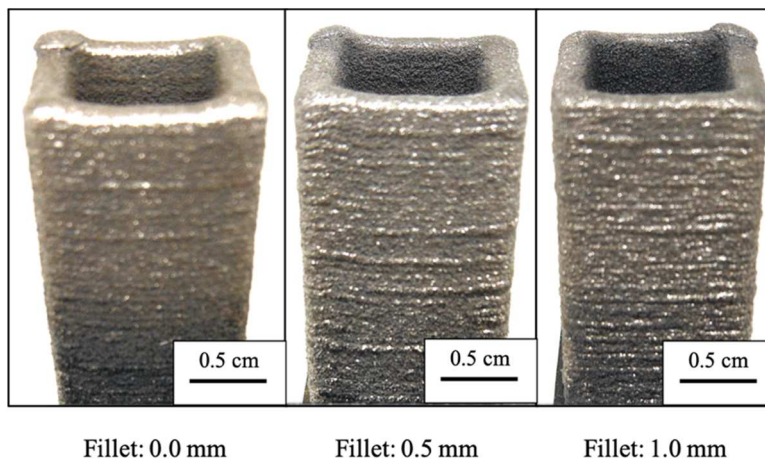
As-built single-wall cubical shells using laser-DED with 0.5 inches side.
